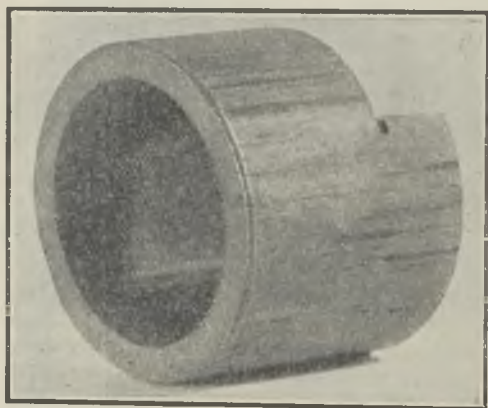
SECTION OF EXTRUDED TUBE OF CYPRITIC STEEL.
